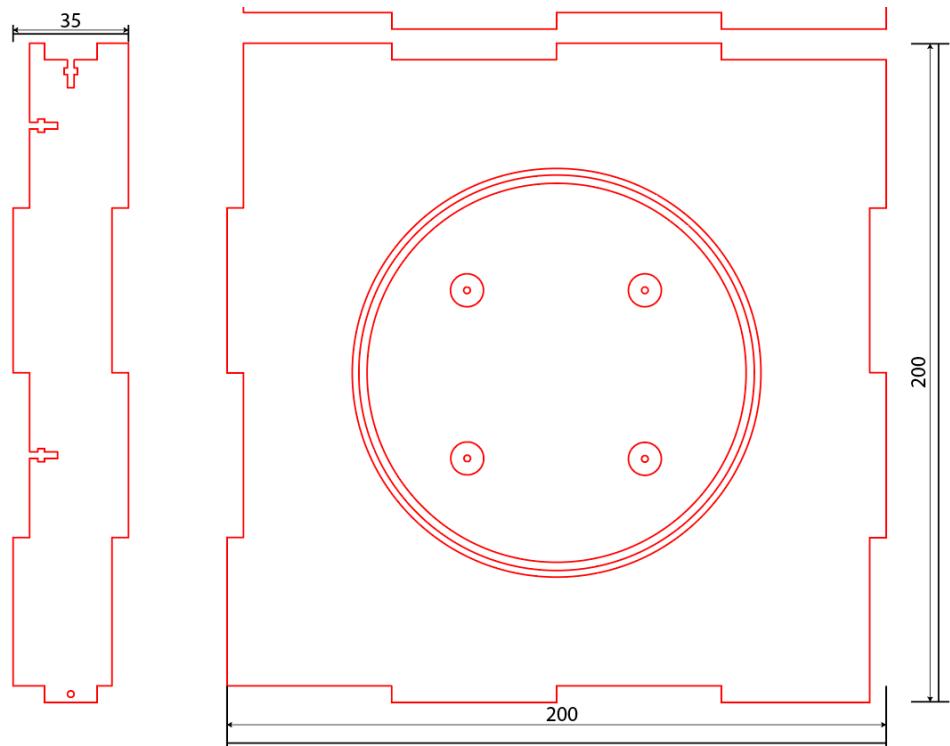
Exterior Design: The upper part and side's technical sketch
